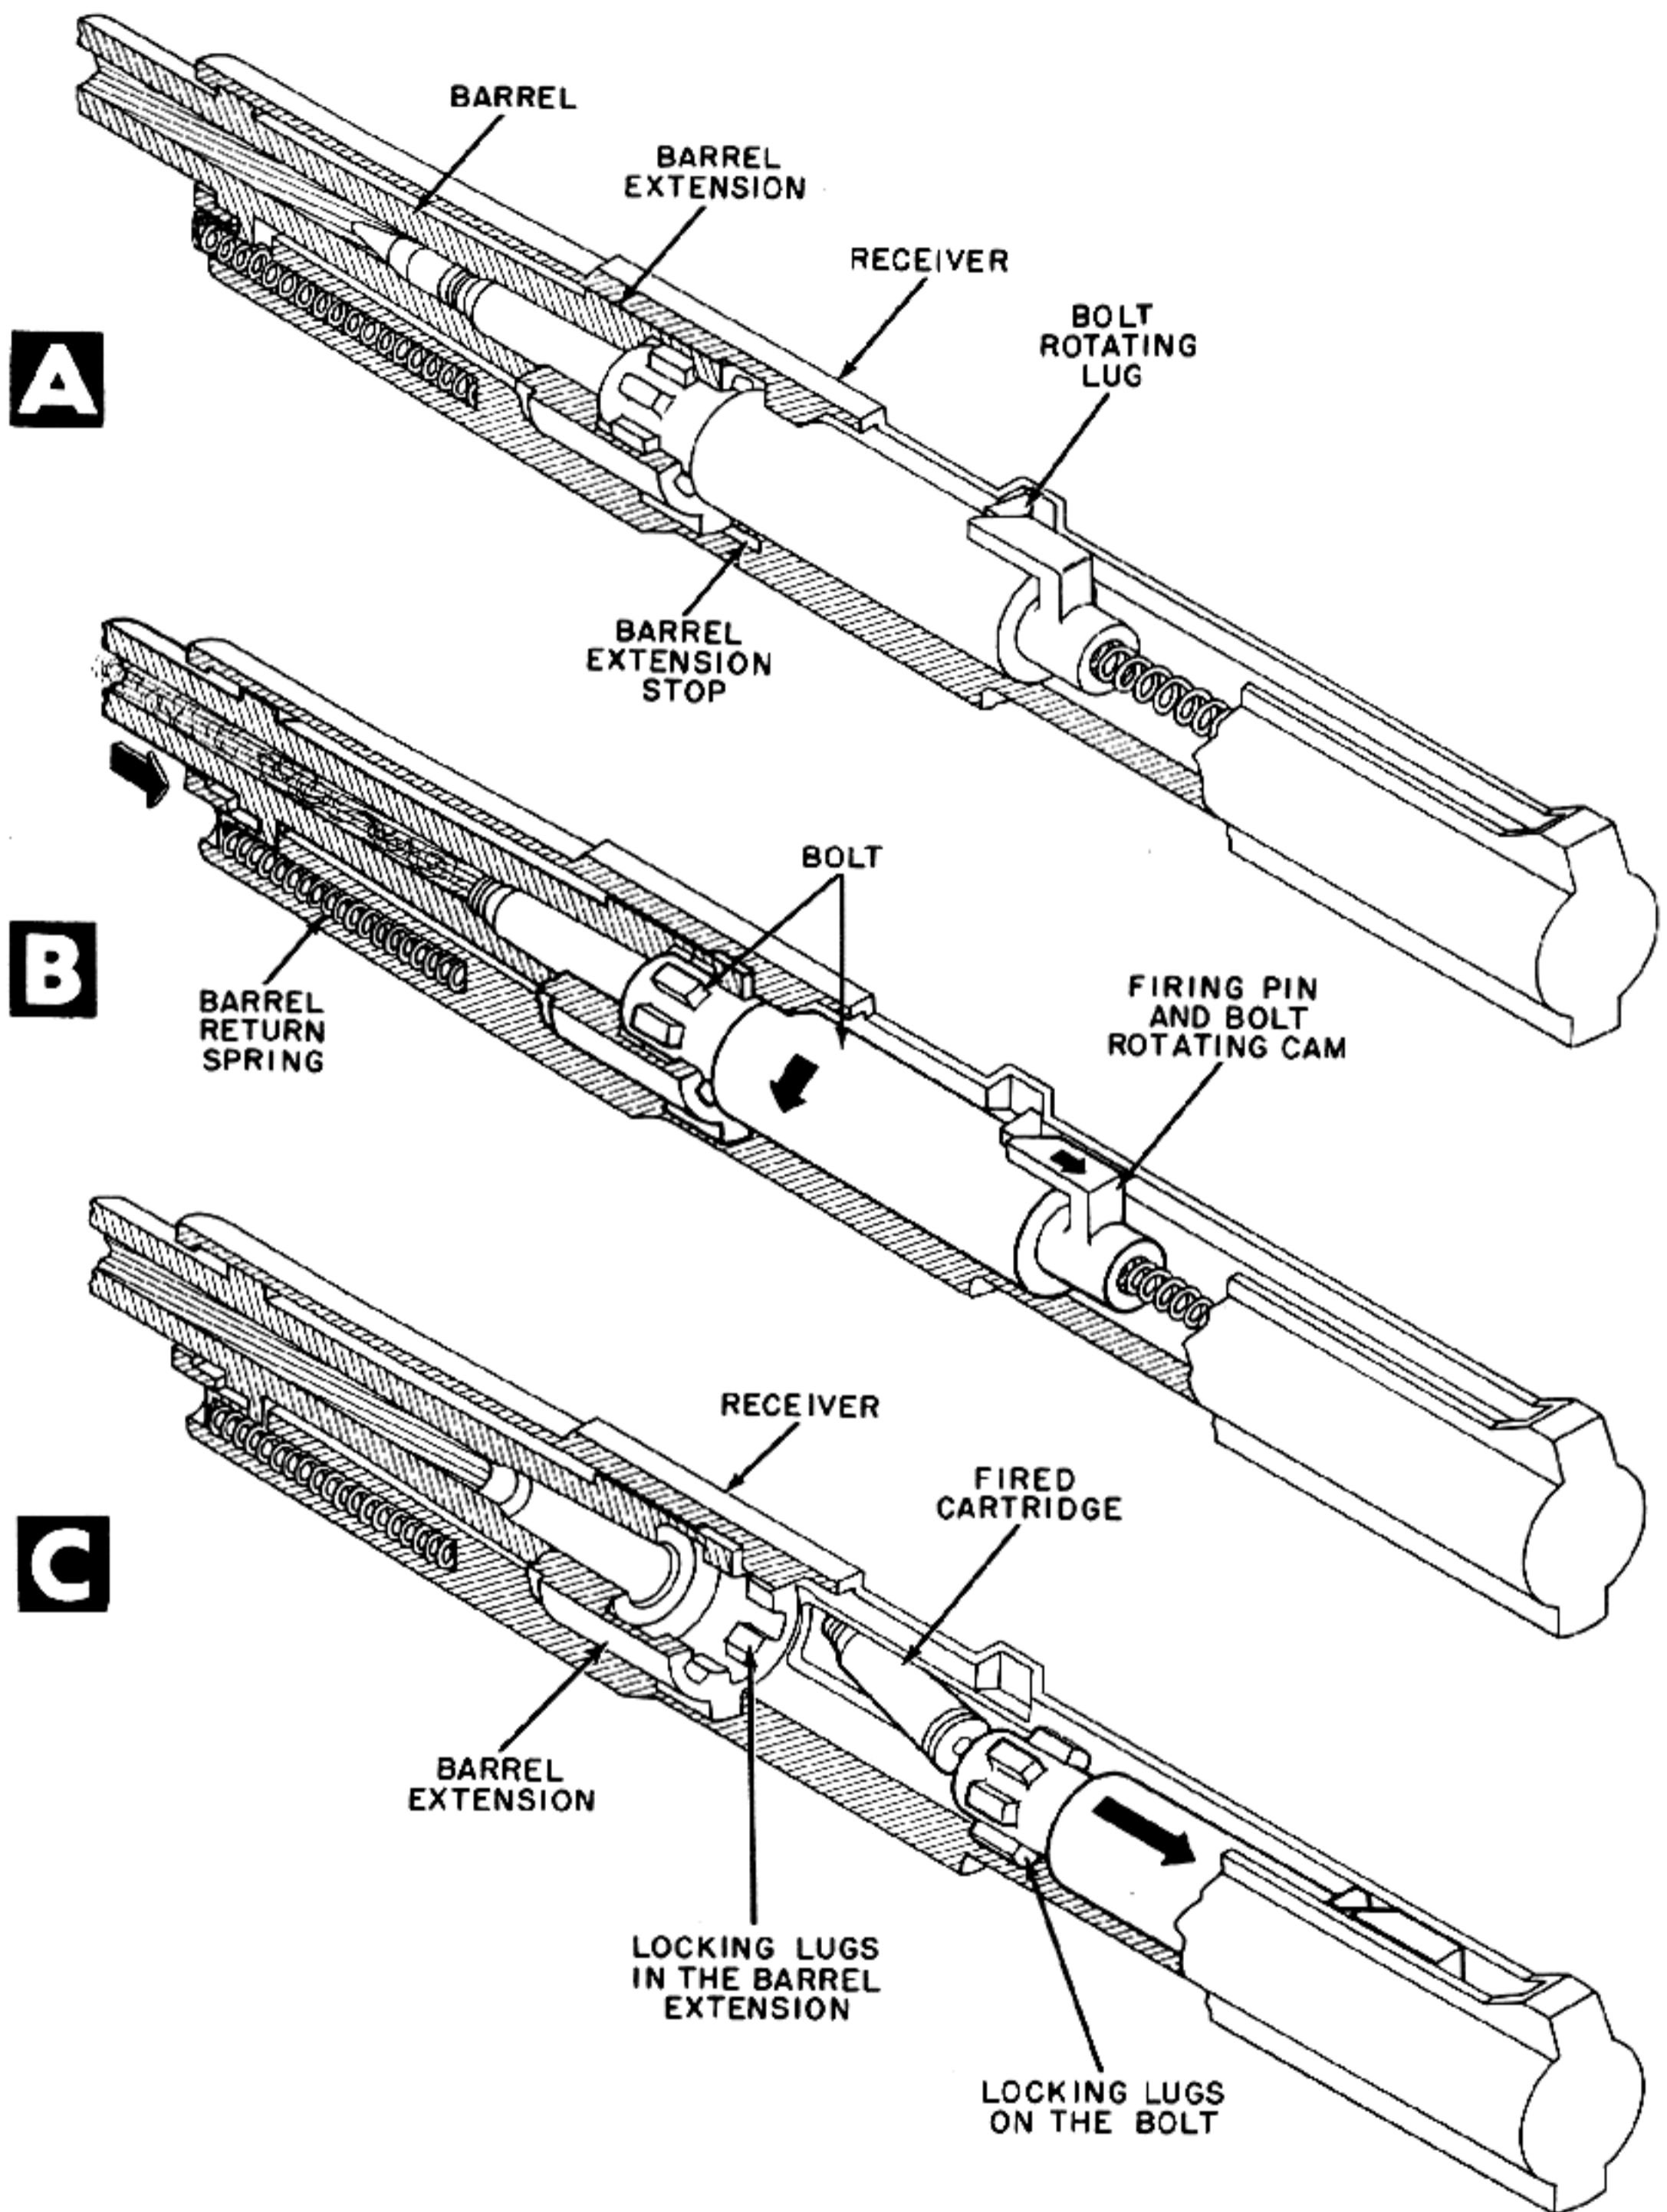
Cam Grooves in Receiver Cause Recoiling Bolt Extension To Unlock Bolt.
